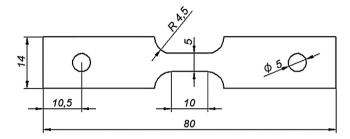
Gleeble tensile tests – specimen dimensions (in mm).
